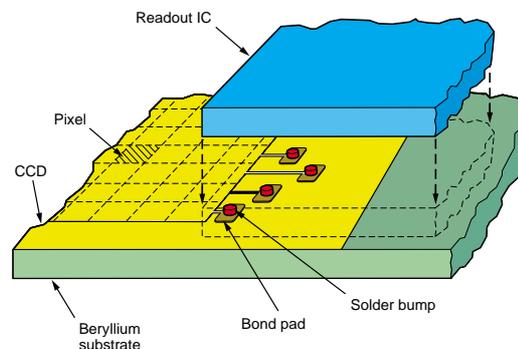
Exploded isometric view of the interconnect region between CCD and readout chip.
